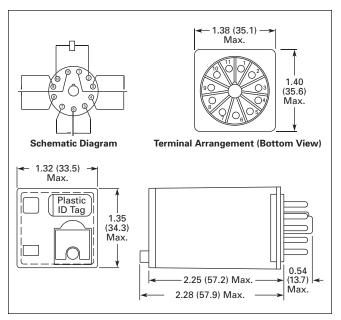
D3PF3 — Approximate Dimensions in Inches (mm)
